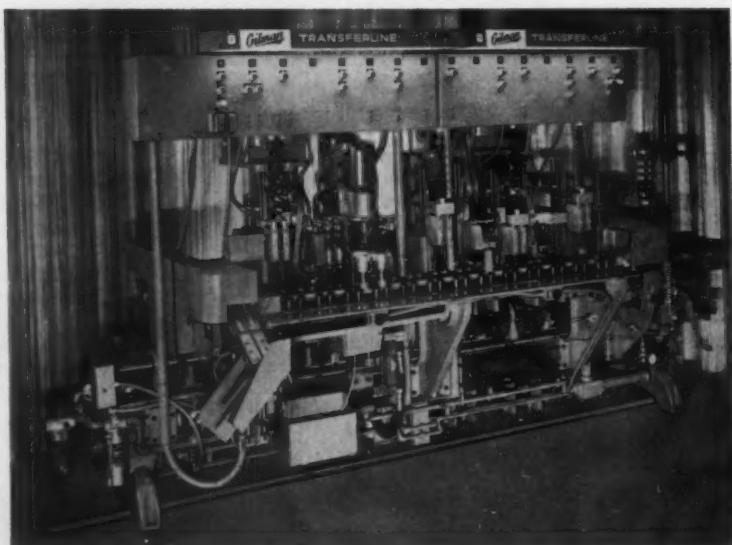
Sixteen-station Transferline automatic assembly machine manufactured by the Gilman Engineering & Mfg. Co.
